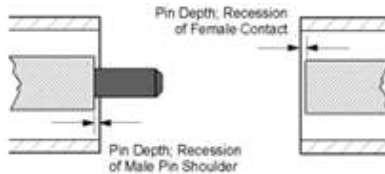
Proper pin depth is necessary for ensuring measurement accuracy
